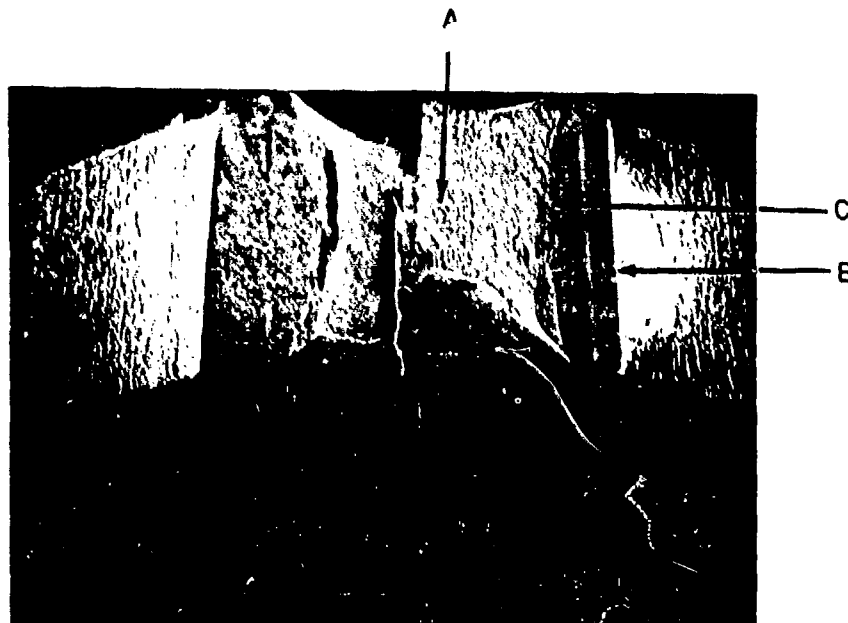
Fracture surface of a temper-embrittled HY-130 fatigue specimen, 8x.
